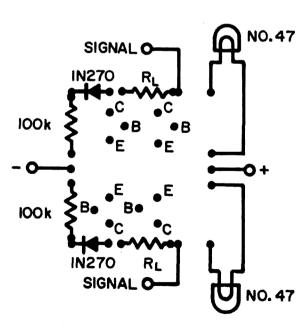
Full-size drawing of the layout for the etched circuit board.
